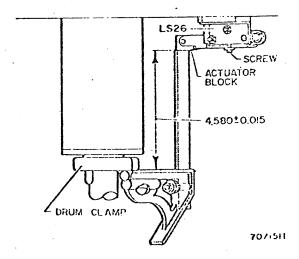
Drum Interlock Switch (LS26) Adjustment
